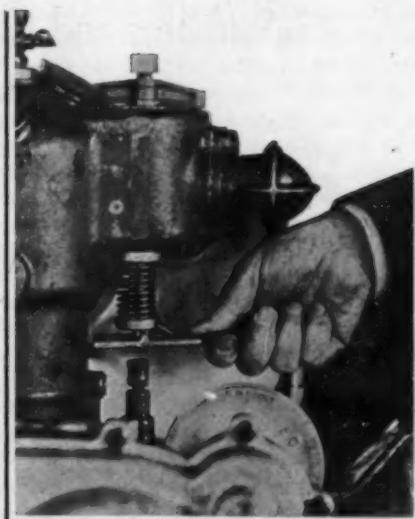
LOCOMOBILE VALVE REMOVAL.
